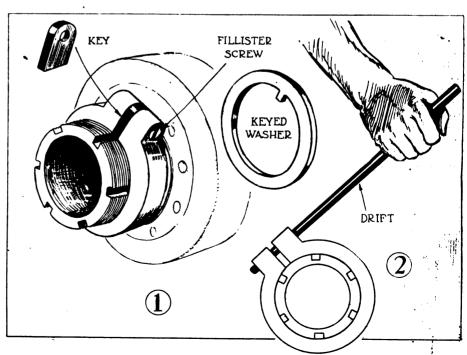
The rear wheel bearing is secured with a keyed washer and lock collar with a key between the ends. Fig. 2—The lock collar is turned with a drift pin
